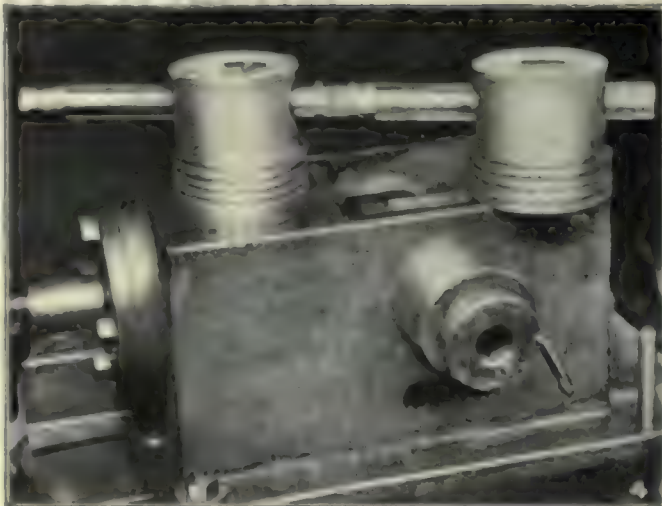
FIXTURE AND BAR FOR BORING PISTONS
